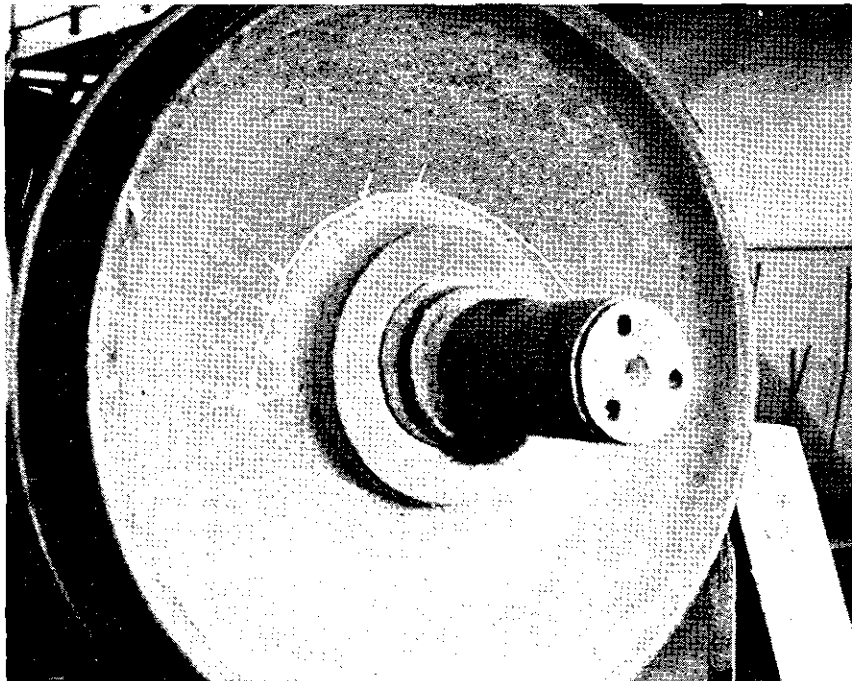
VIEW OF WHEEL 15C (front side)
